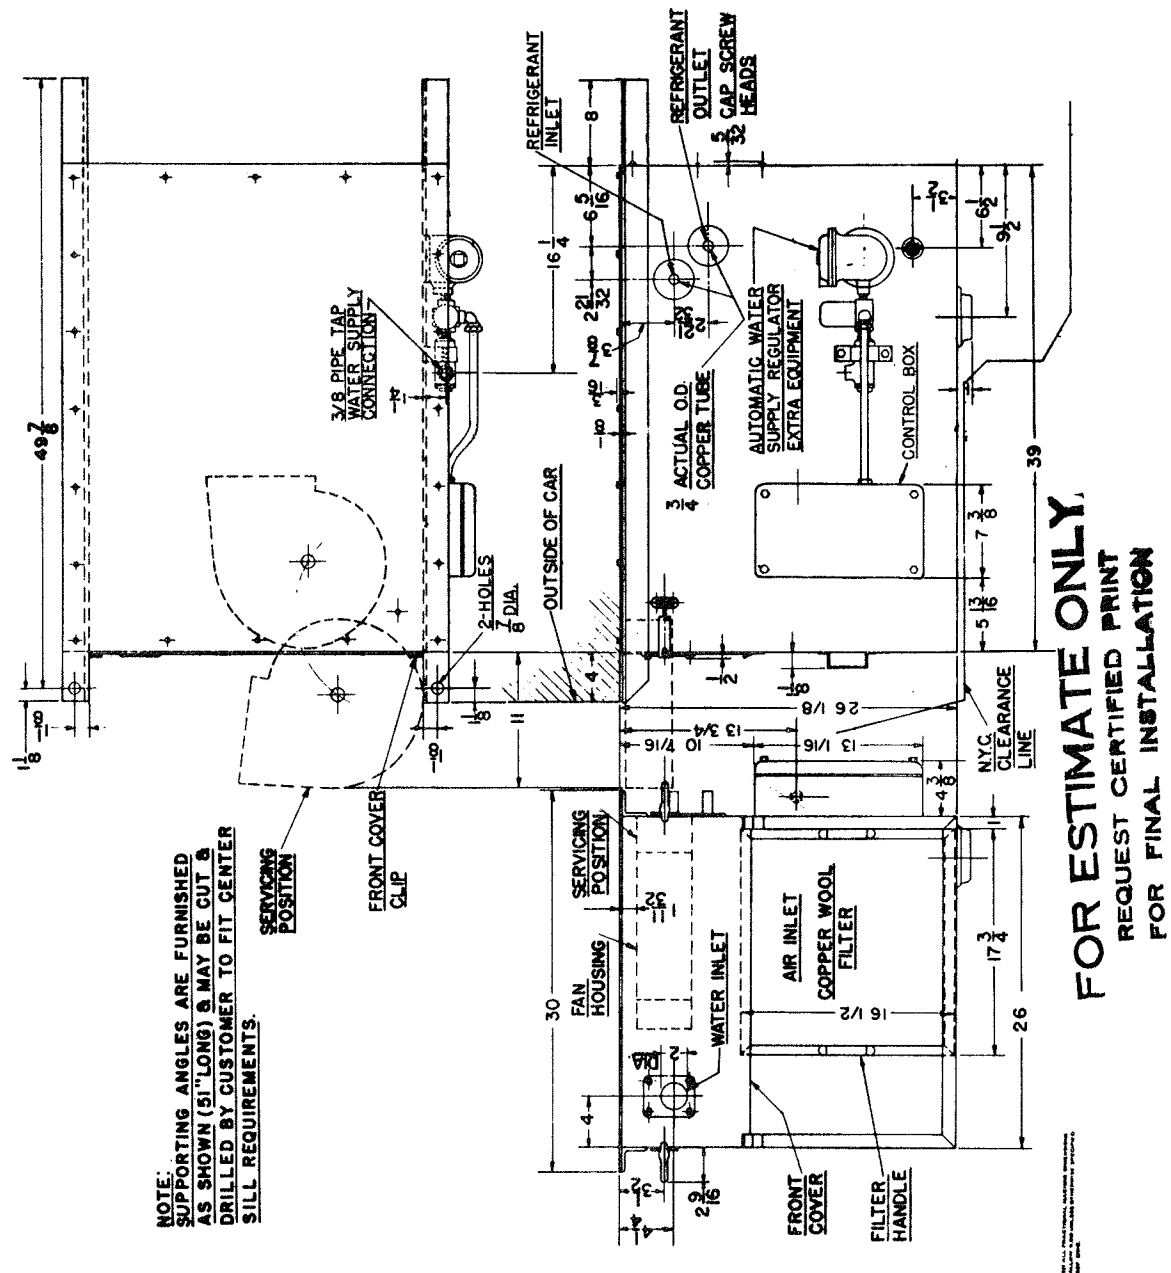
SUB-COOLER DIMENSIONAL DIAGRAM (SK-347-M)
